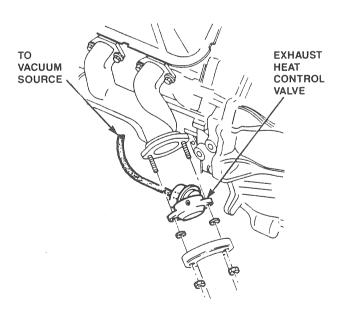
Heat control valve installation. (Courtesy of Ford Motor Co.)
